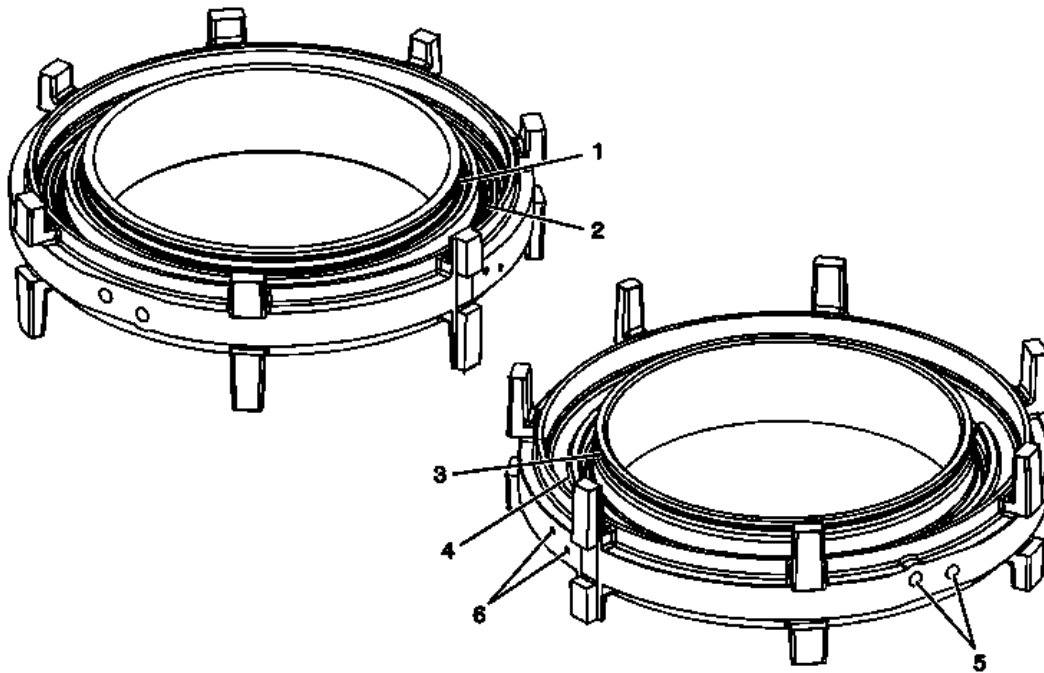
Identifying Low and Reverse & 1-2-3-4 Clutch Housing
